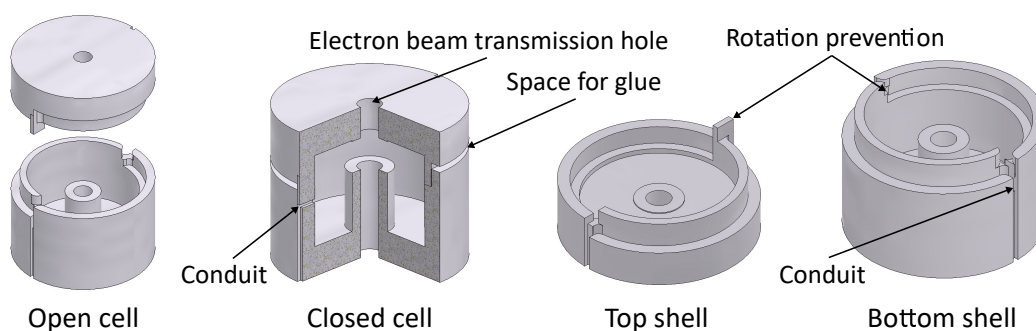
CAD drawing of the 3 mm *in situ* microplasma cell shells. Technical drawings with dimensions can be found in the appendix A.
